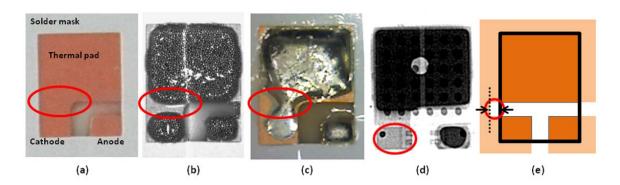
An incorrectly laid out PCB may result in solder being wicked away from the smaller electrical pad to the larger neighboring thermal pad. In this example, the cathode is directly connected to the thermal pad without any solder mask barrier in between (a). Even though the solder paste on the thermal pad and cathode is disjointed after dispense (b), during reflow the solder bridges between the cathode and thermal pad (c). In the worst case scenario, all the solder is wicked away from the smaller cathode to the larger thermal pad causing an electrical open (d). The PCB should, therefore, be designed such that any connection between the electrical pad and thermal pad remains covered by the solder mask even for the worst possible alignment error between the solder mask and the metallization (e).
